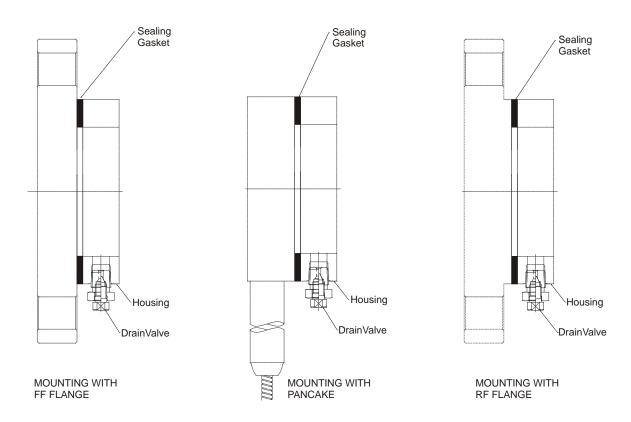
Exploded View - Mounting with Gasket and Drain Valve
